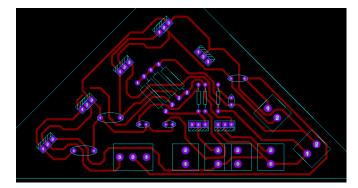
PCB Design Layout of the Motor Driver Circuit
